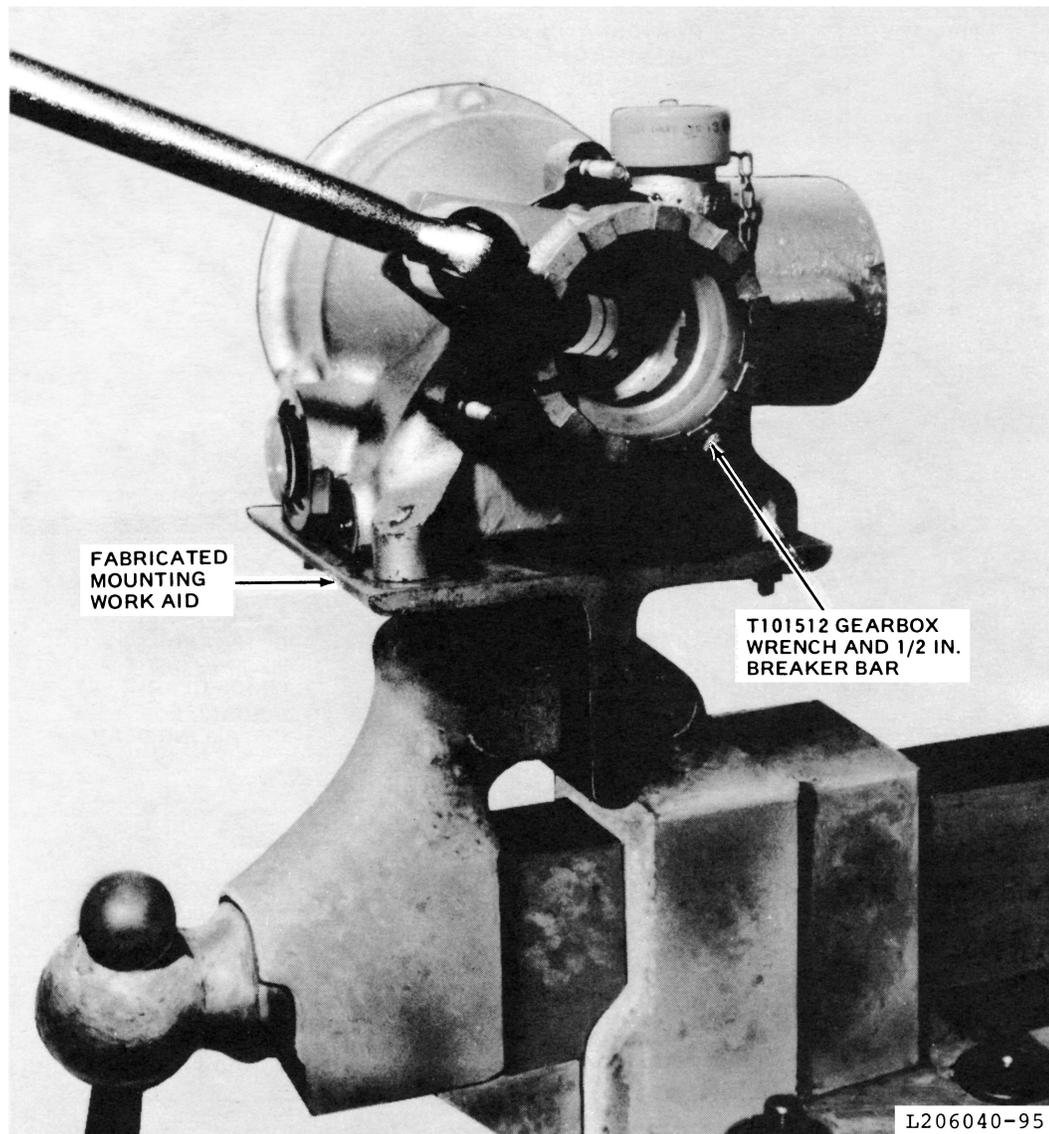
A. Output shaft outer nut — tool application, T101512 and mounting work aid.
